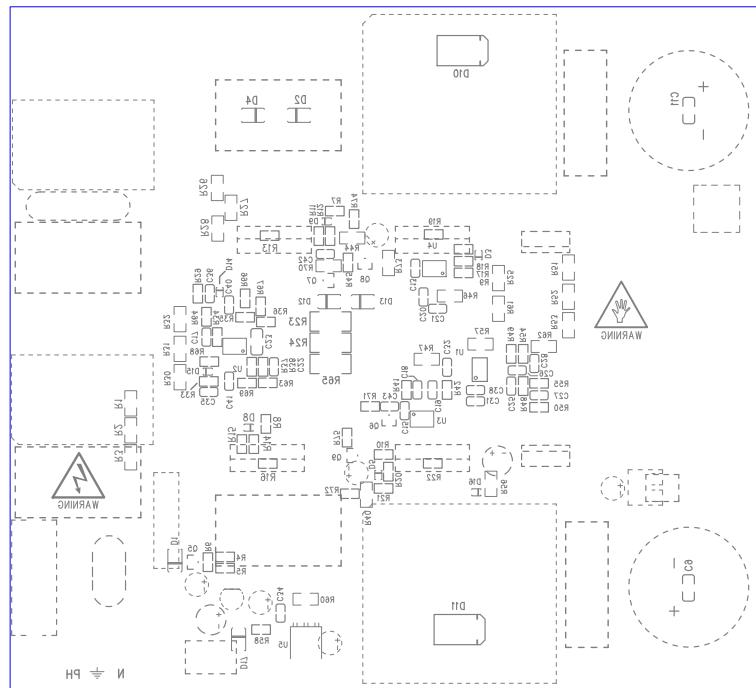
EVL4986A-1KWBL PCB tracks—top side
